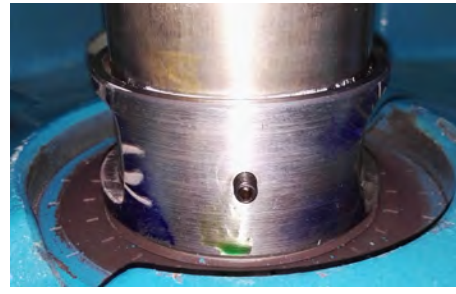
Sleeve with grub screw to keep sleeve in place.
